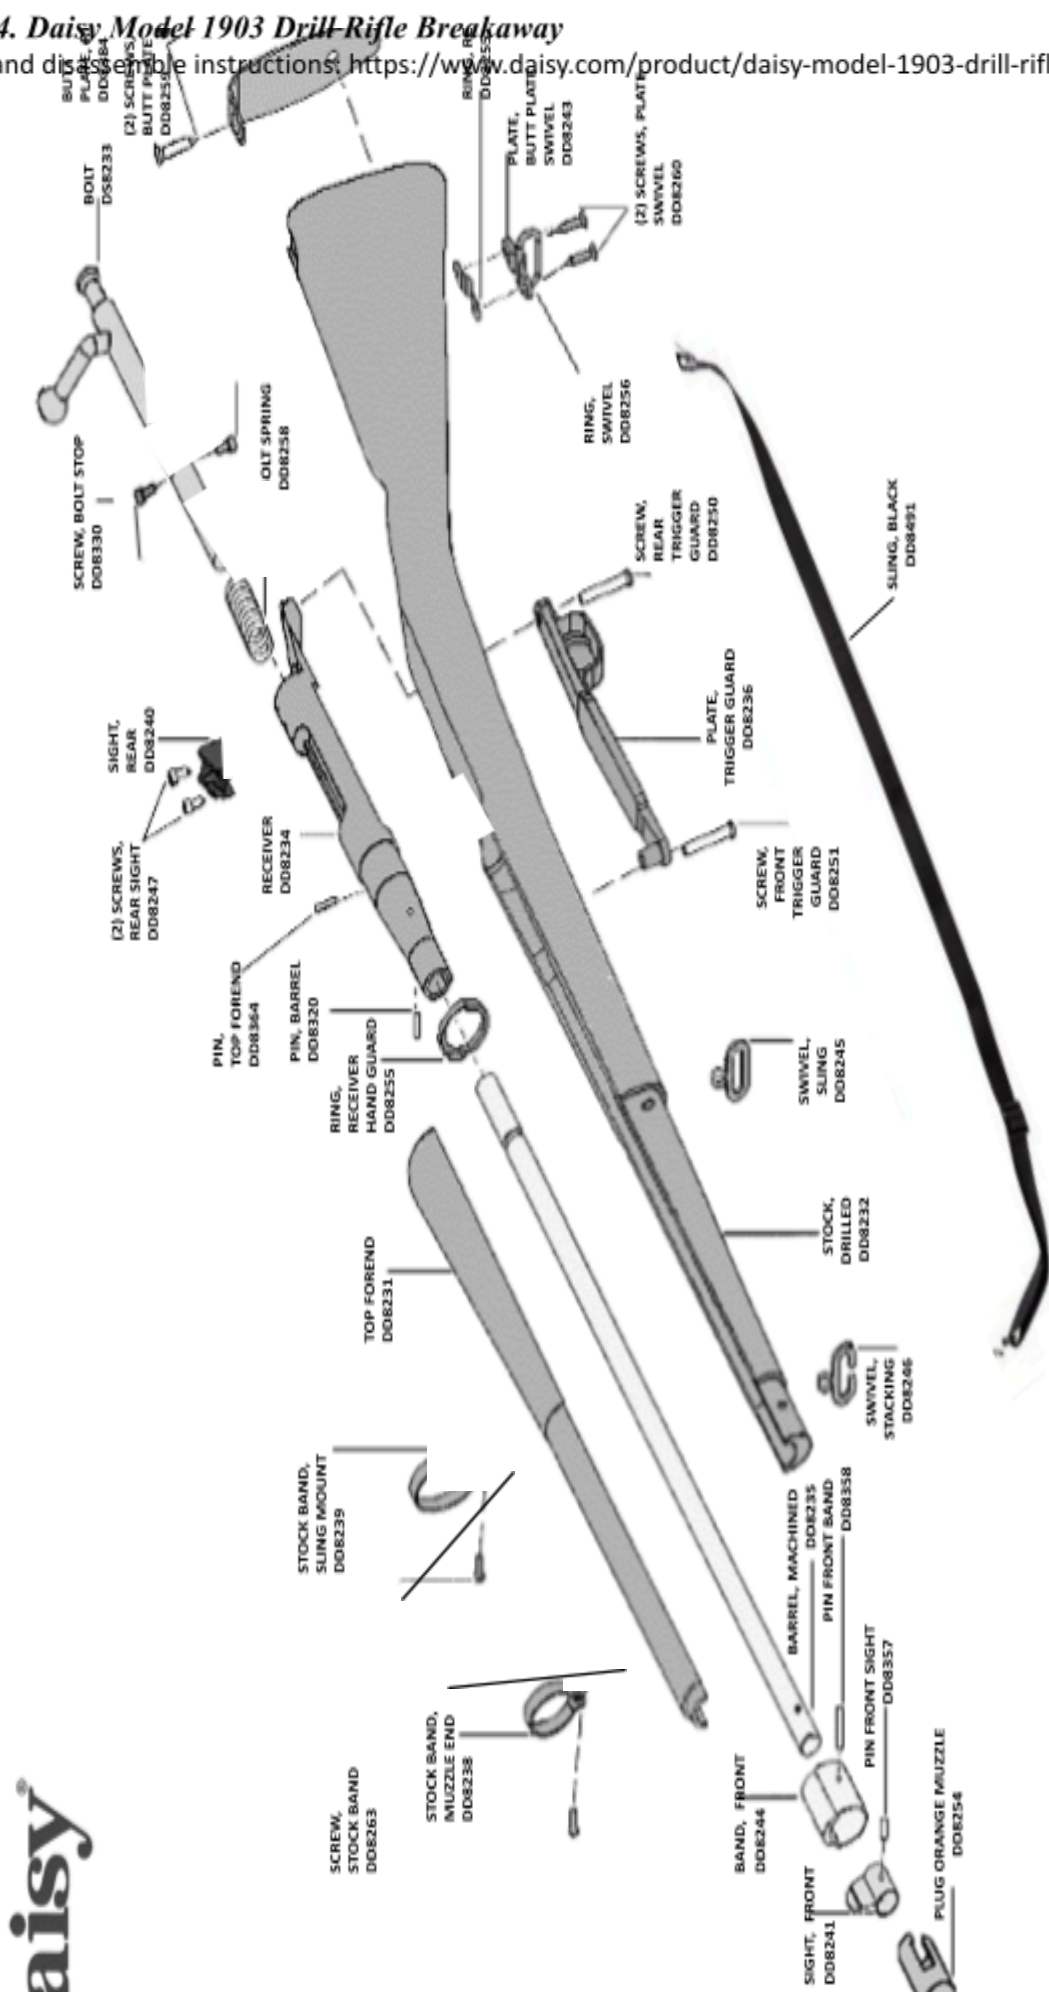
Daisy Model 1903 Drill Rifle Parts
